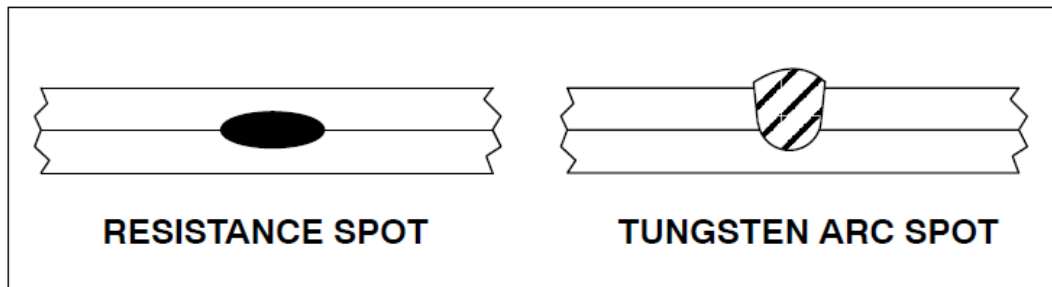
Resistance Spot Weld and TIG Weld Comparison
